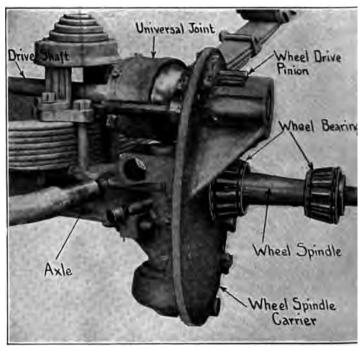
Showing Arrangement of Mobile Wheel Spindle Us Jeffery Four Wheel Drive and Steer Truck.
